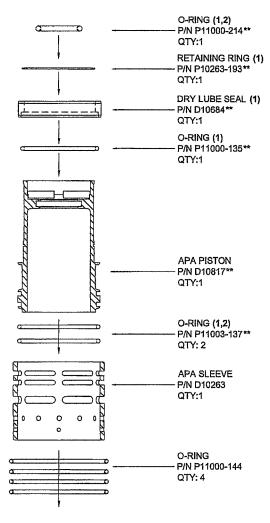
DRY LUBE APA VALVE PART CONFIGURATION.
